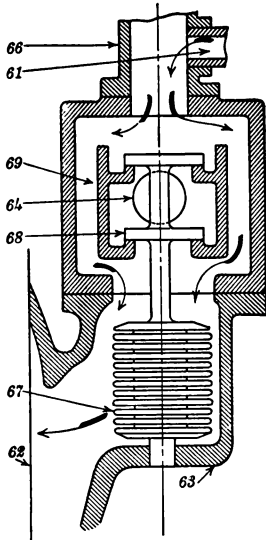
THERMOSTAT OPERATING CONTROL VALVE
